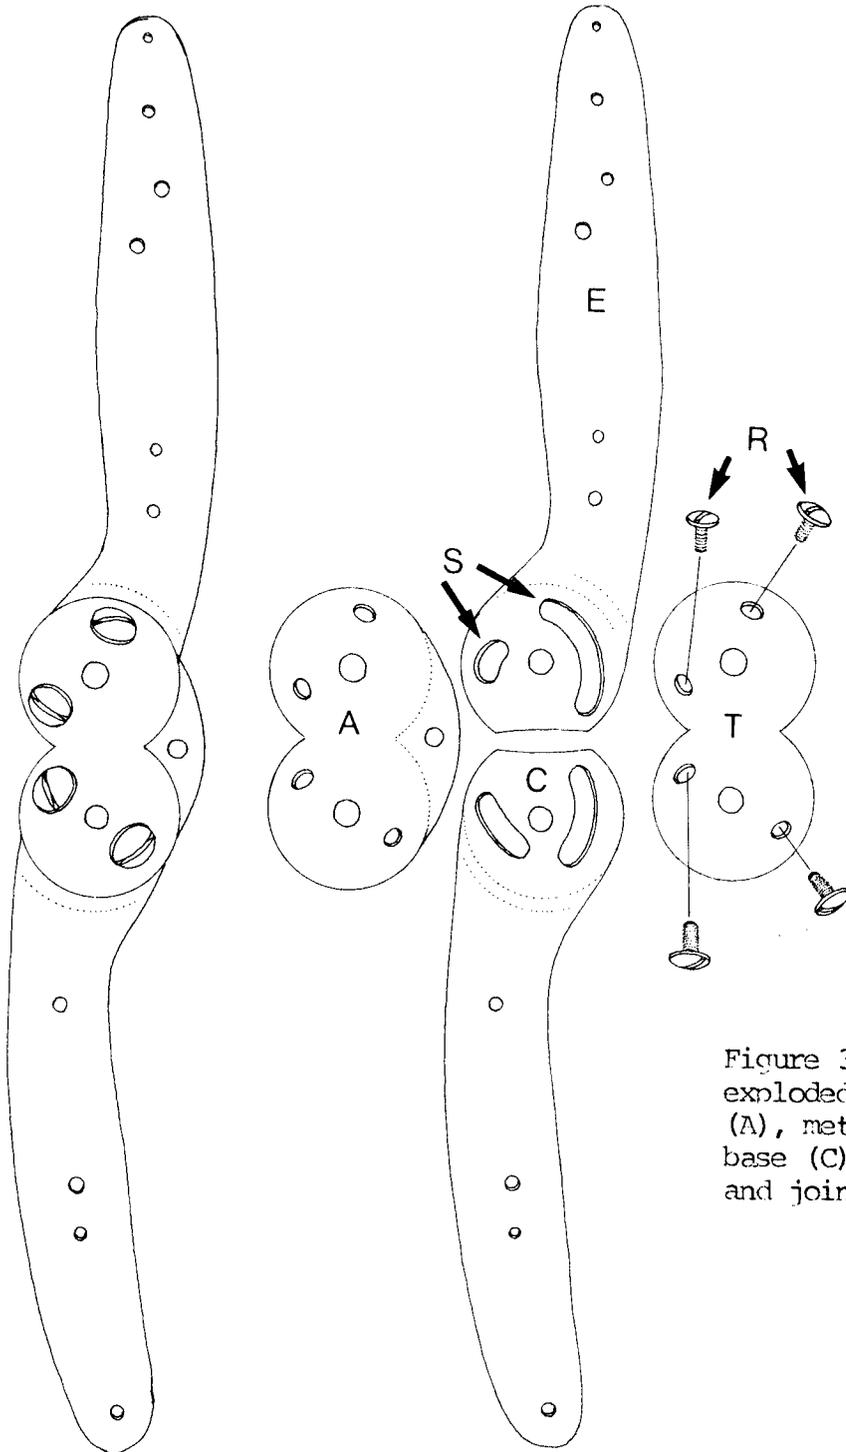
Taylor Brace Joint, exploded view showing convex base (A), metal extensions (E), extension base (C), metal pins (R), slots (S) and joint cover (T).
